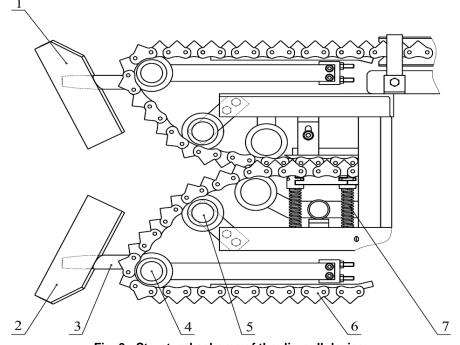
Structural scheme of the dig-pull device 1 - Left digging shovel; 2 - Right digging shovel; 3 - Shovel handle; 4 - Adjustment wheel I; 5 - Adjustment wheel II; 6 - Clamping and conveying chain; 7 - Tensioned spring
